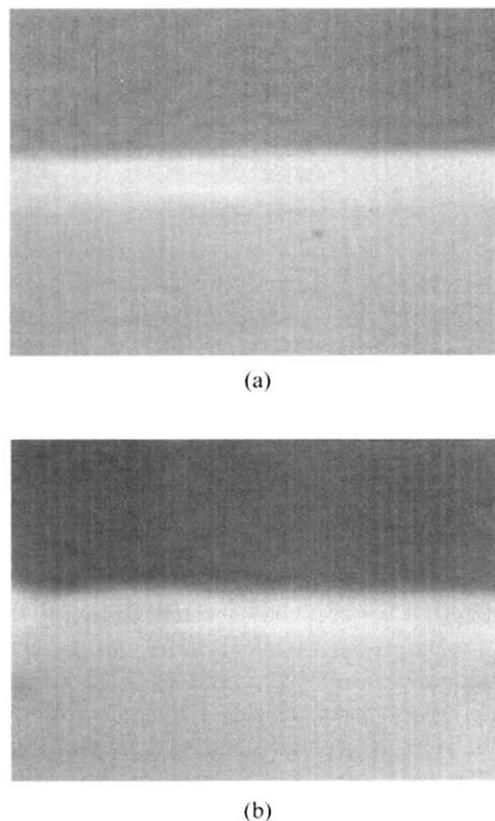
Welding joint area after 56 thermal cyclic test (DFT  $1200\text{ }\mu\text{m}$ ); (a) coating K, (b) coating H
